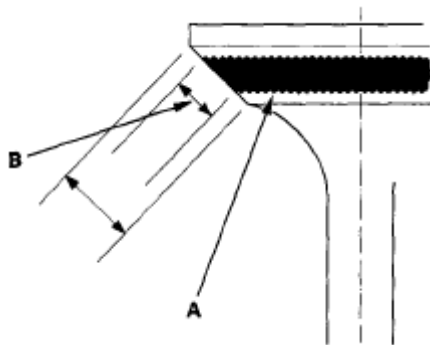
Identifying Rocker Shaft Holder Mating Areas
